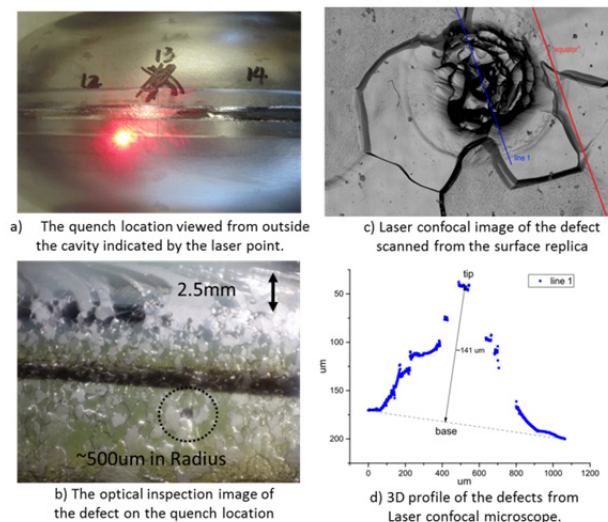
The defect observed on quench location of TB9AES022 by inspection system and surface replica.
